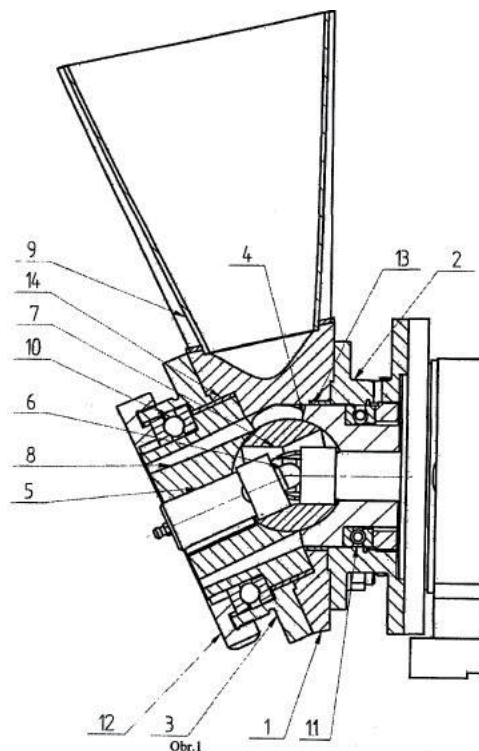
Cut of the pelletizer PLG2010 [13]. 1 – Wedge body, 2 – first flange, 3 – second flange, 4 – first drive disk, 5 – second drive disk, 6 – the kinematics of the drive mechanism, 7 – ball tool, 8 – die, 9 – hopper, 10 – axial bearing, 11 – axial bearing, 12 – die, 13 – sliding sleeve, 14 – sliding sleeve.
